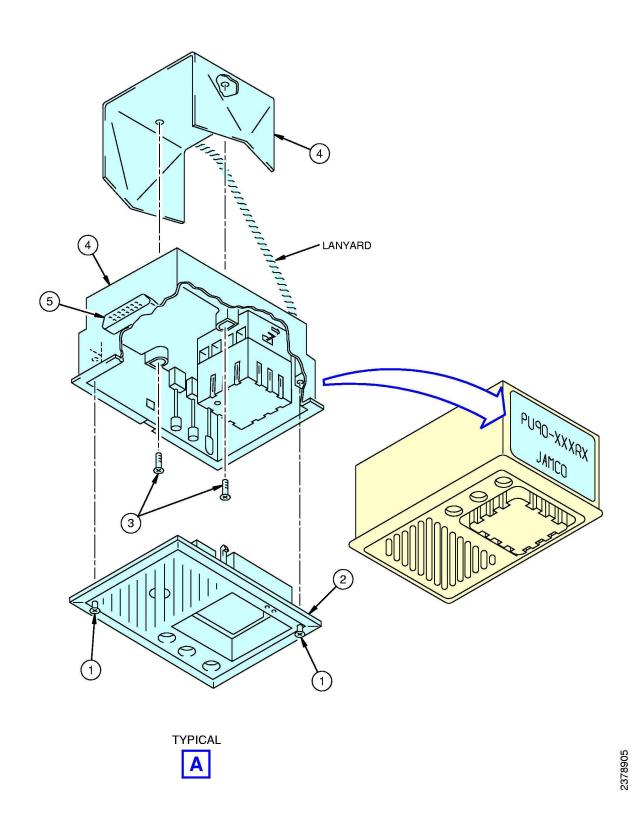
PASSENGER CABIN LAVATORY SMOKE DETECTOR REMOVAL (SHEET 2 OF 3)
